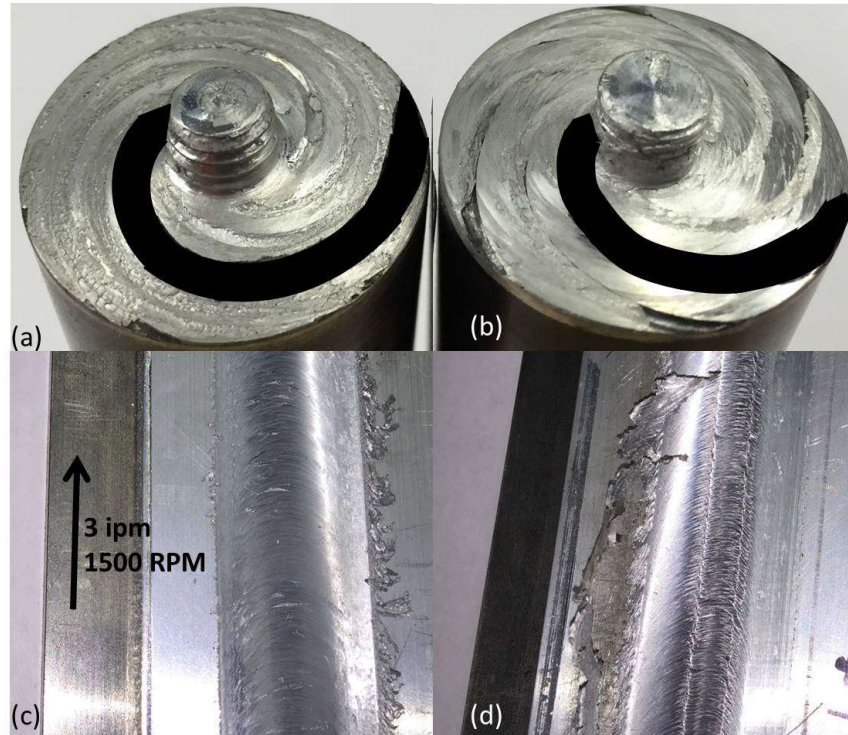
(a) Tool A with threaded probe and scroll pattern highlighted, (b) Tool B with threaded probe and scroll pattern highlighted, (c) Surface of Tool A, (d) Surface of Tool B
